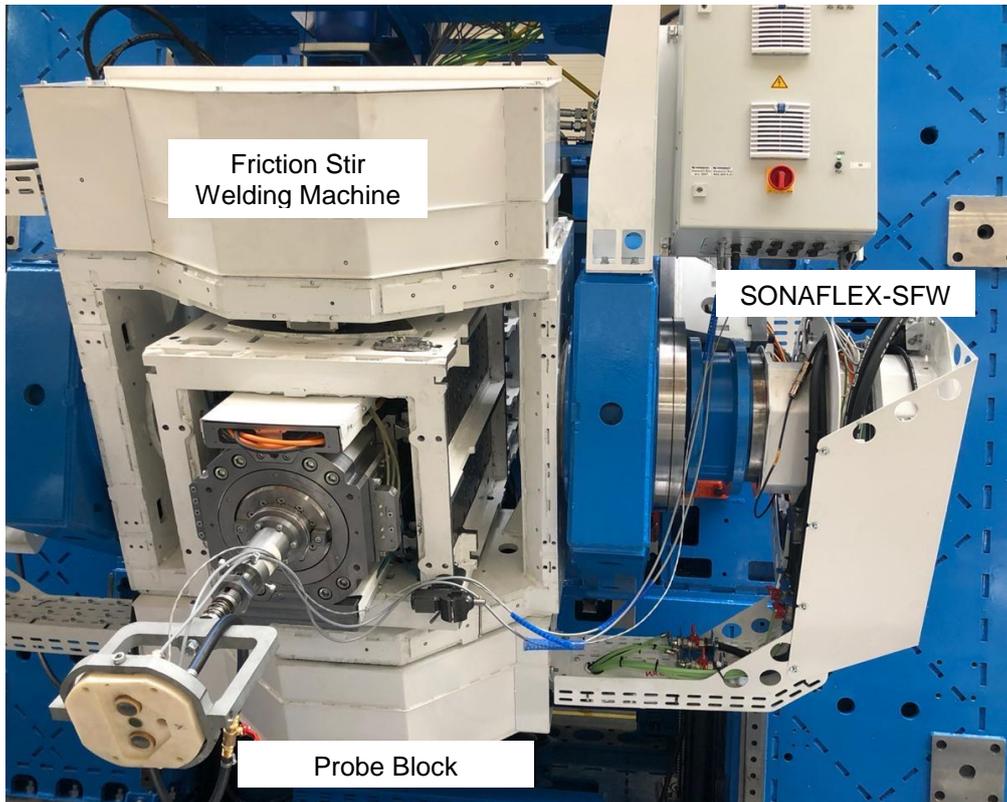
Example of SONAFLEX-SFW integrated with Friction Stir Welding Machine. In this example, the UT probe block is fastened directly to the Welding head
